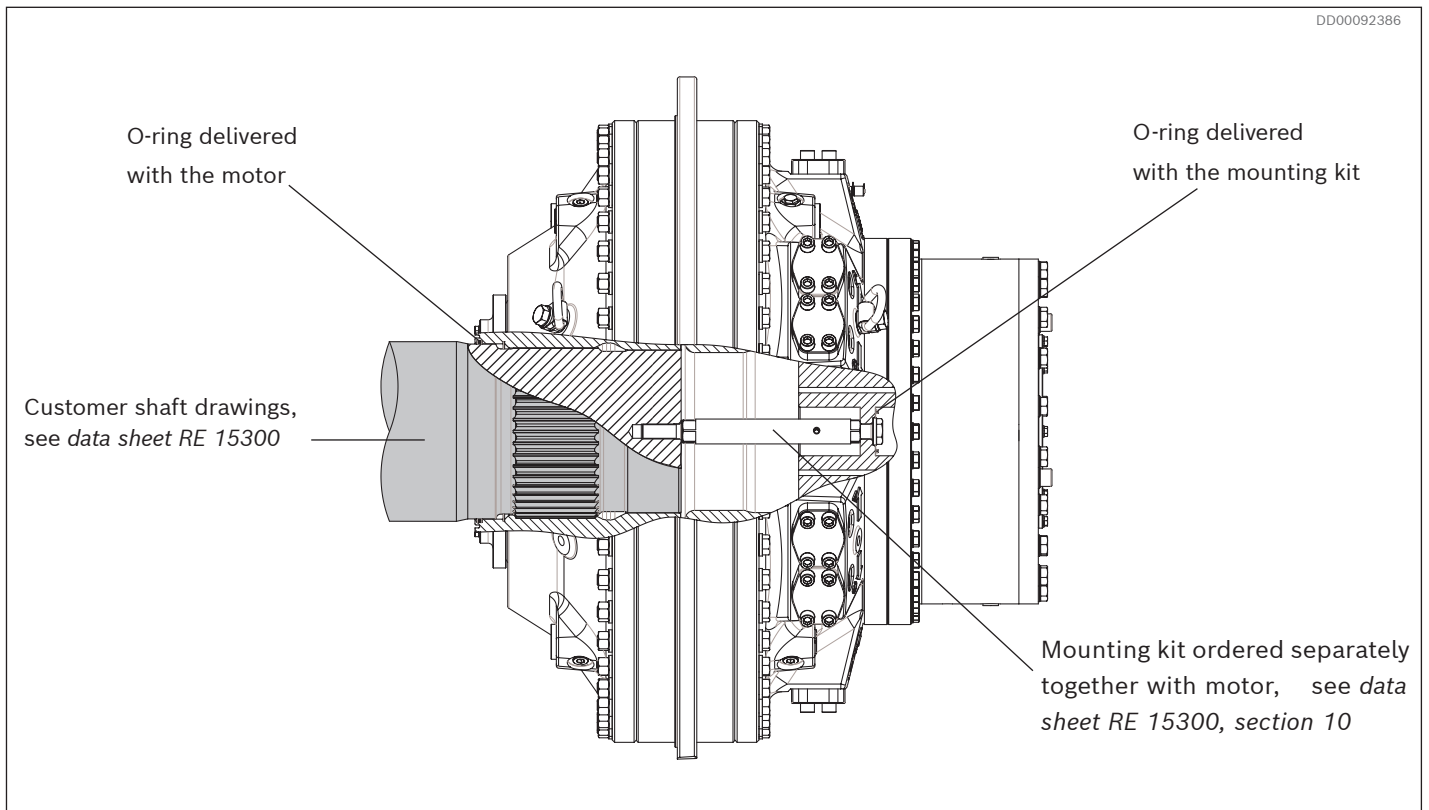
Example torque arm mounted Hägglunds CBm with spline and BICA brake on customer shaft
